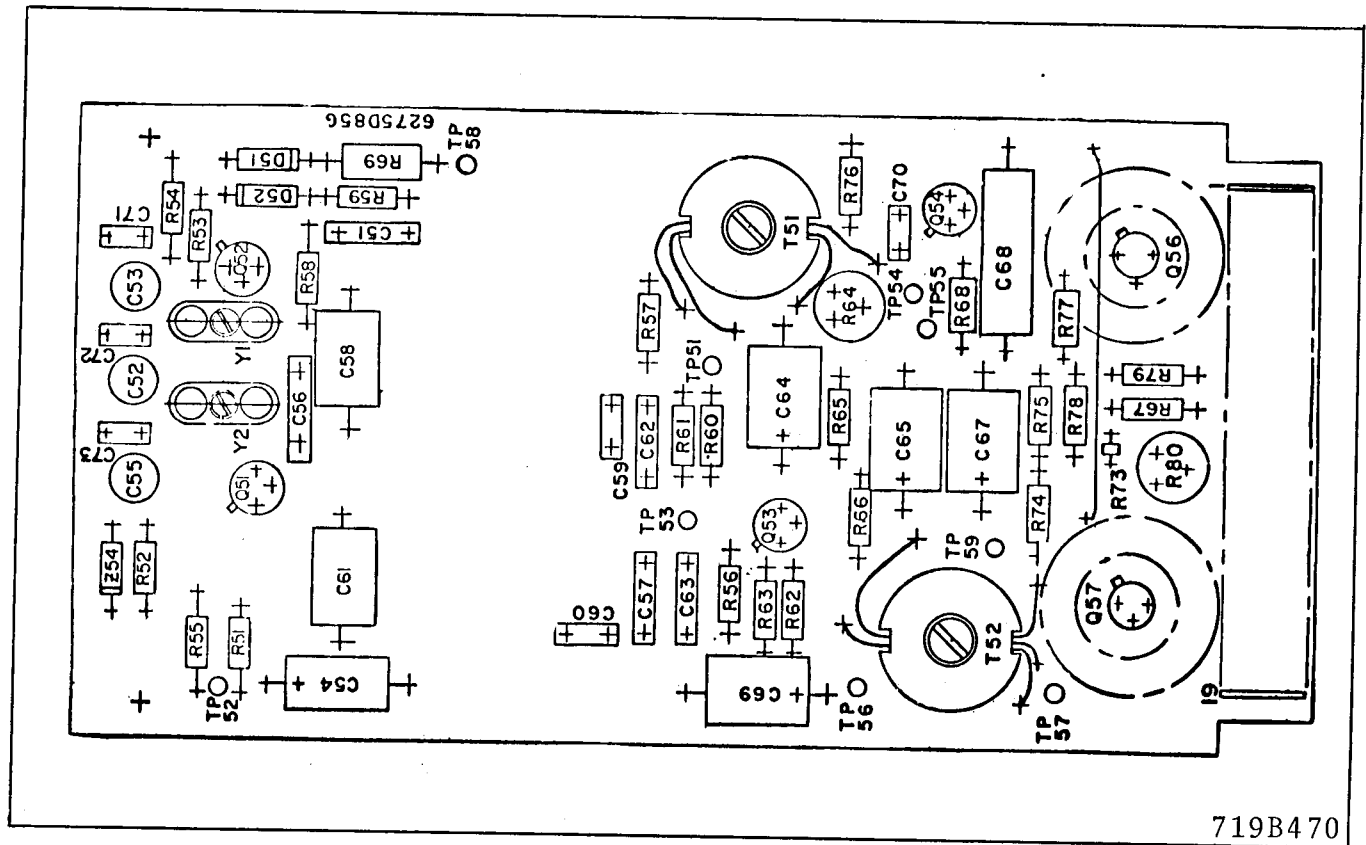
Component Locations on the Type TCF Transmitter Assembly.
